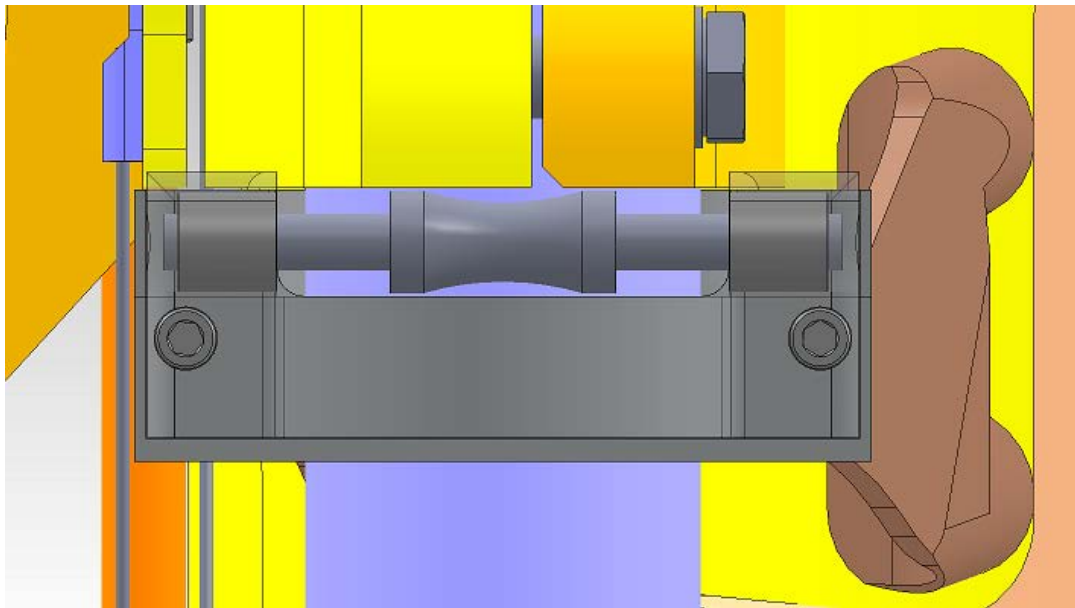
Second Iteration Roller Bearing Design for Top Brackets, Rear View (Adjustment Screws Easy to Reach)
